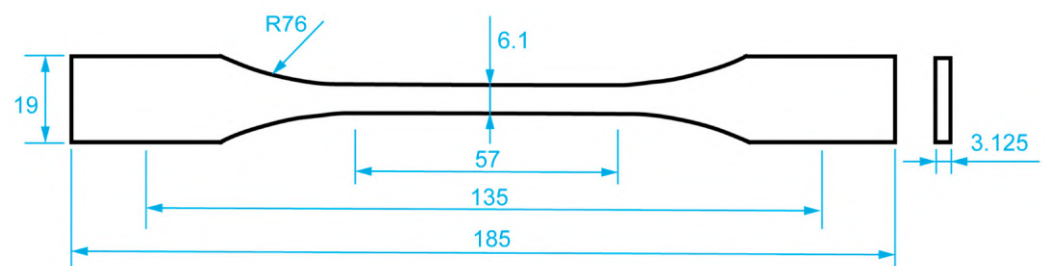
ASTM D638 Type II tensile specimen geometry and dimensions designed according to Galati et al. [25].
